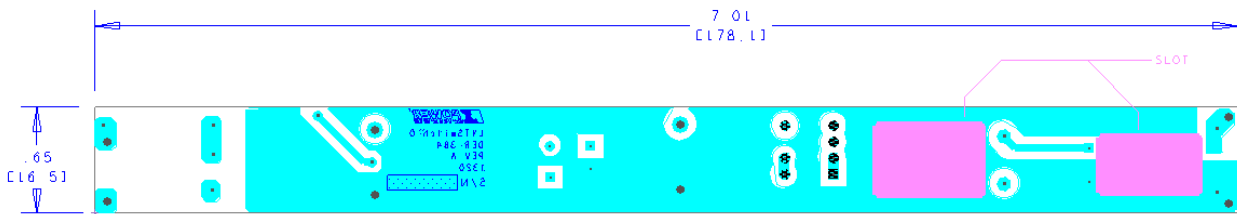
Printed Circuit Layout for P Package.Bottom View.
